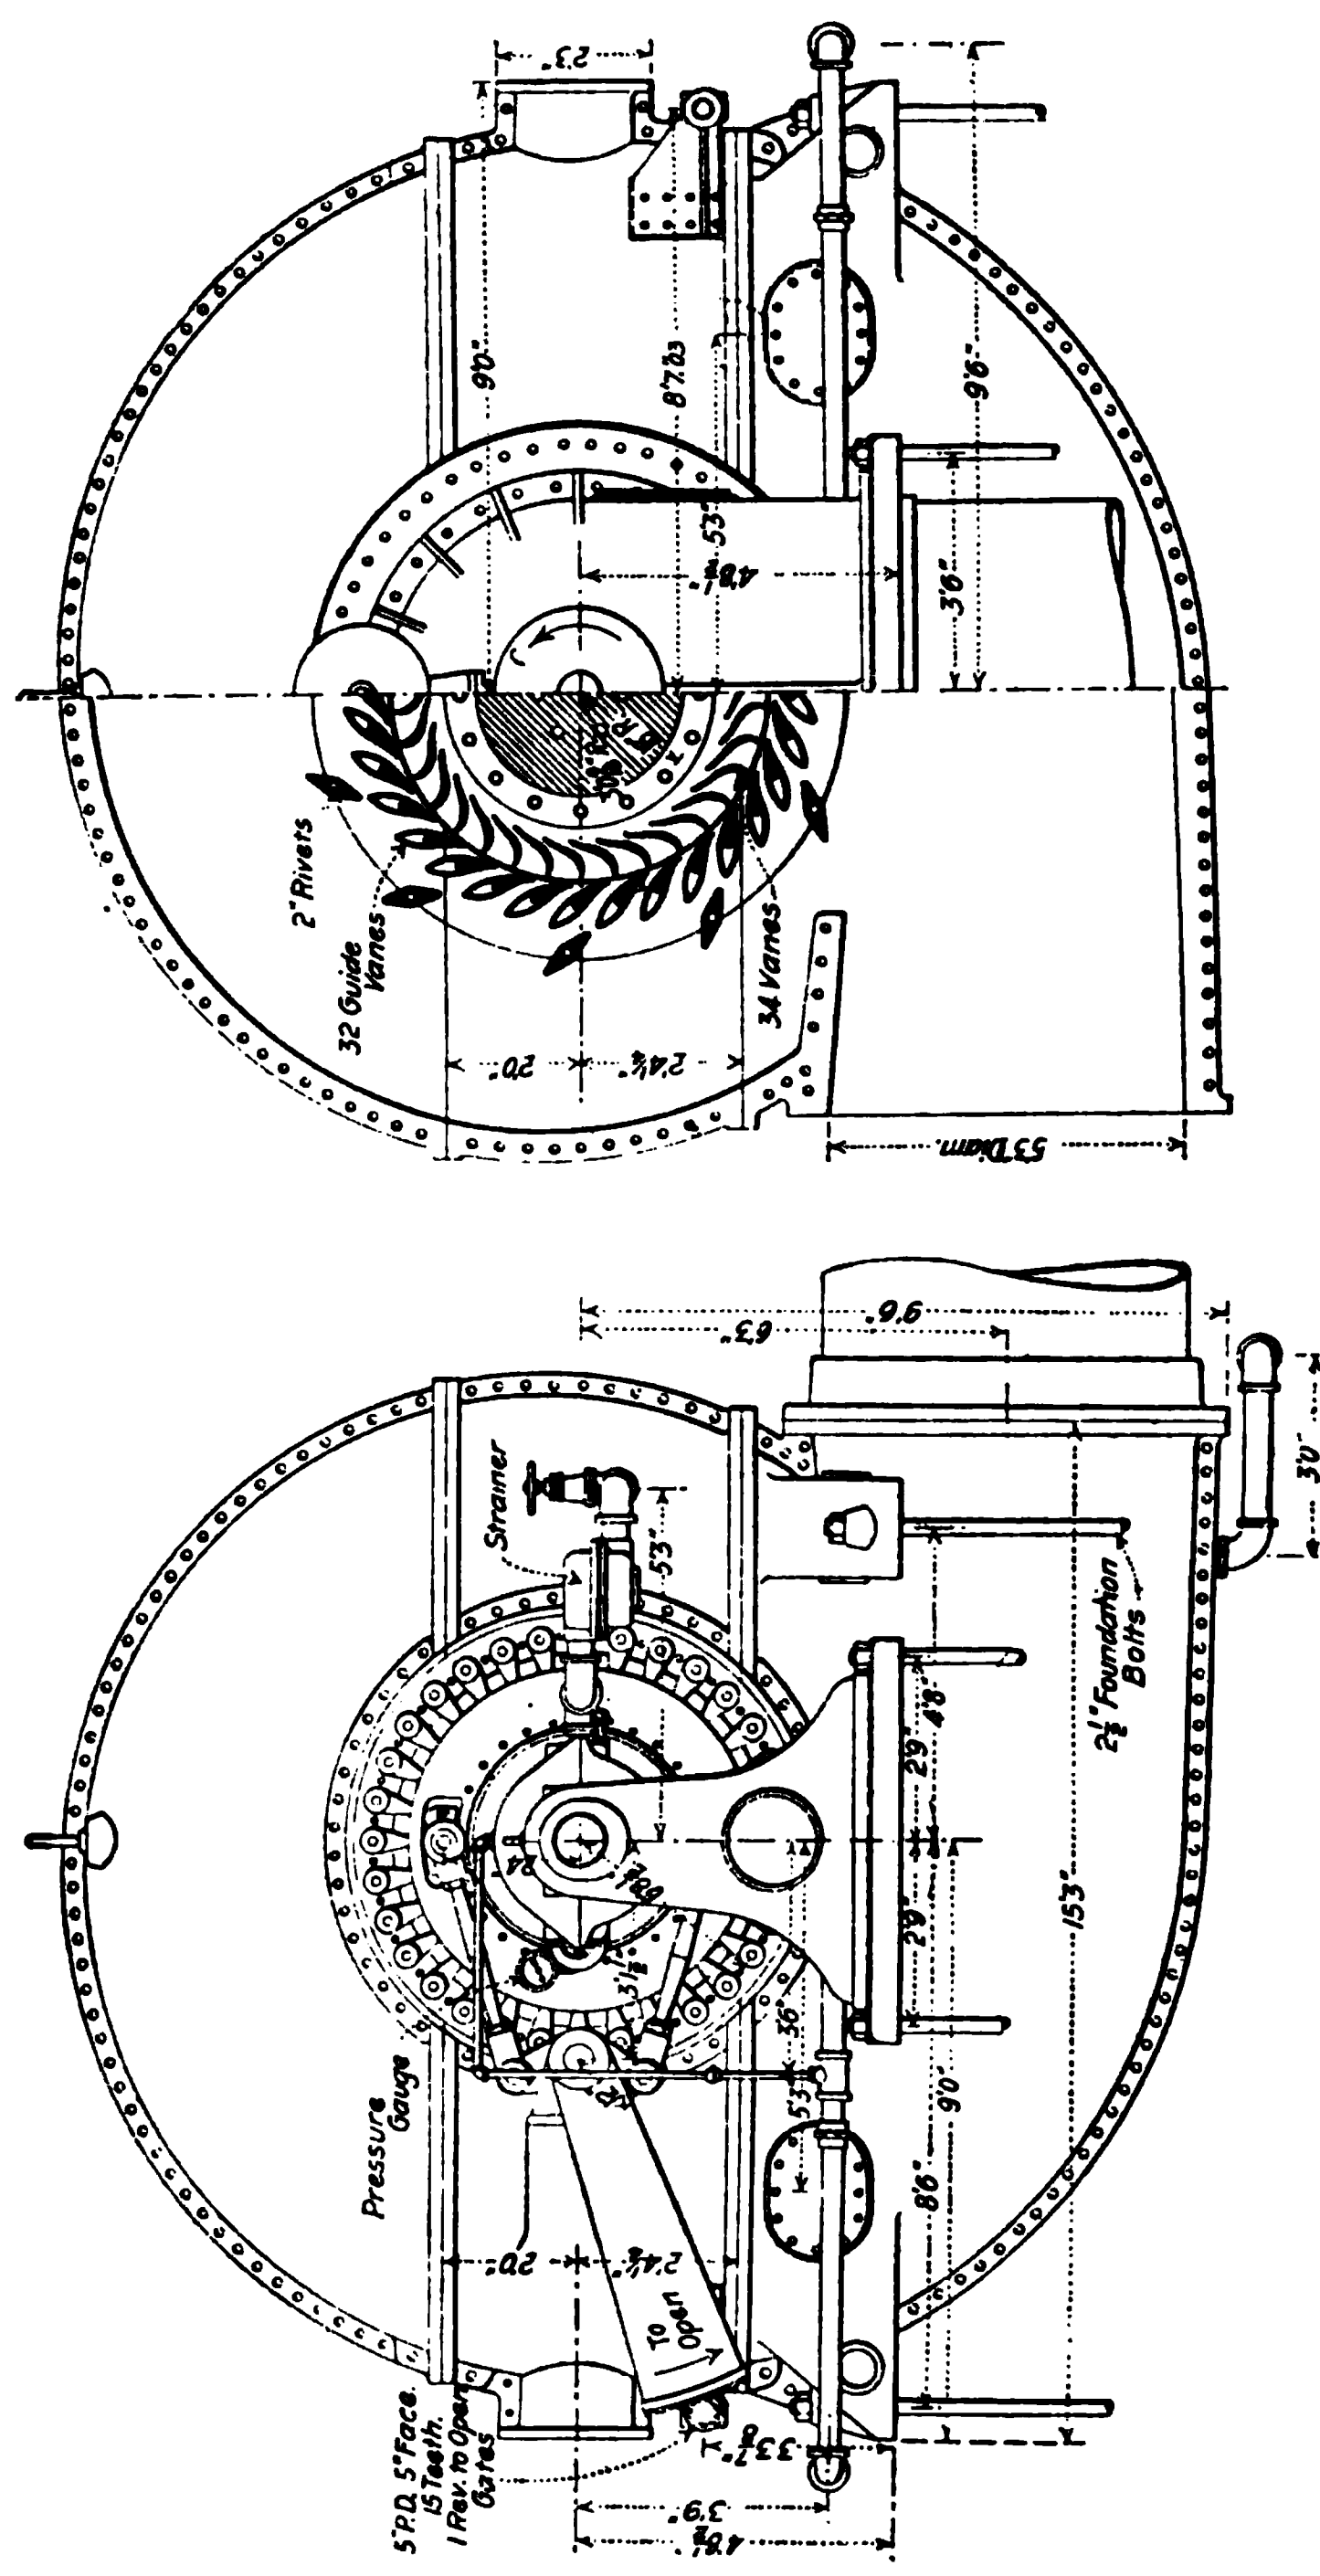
Front and Sectional Elevations showing Controlling Gear used on the 10,000 H.P. Turbine at Snoqualmie Falls.
